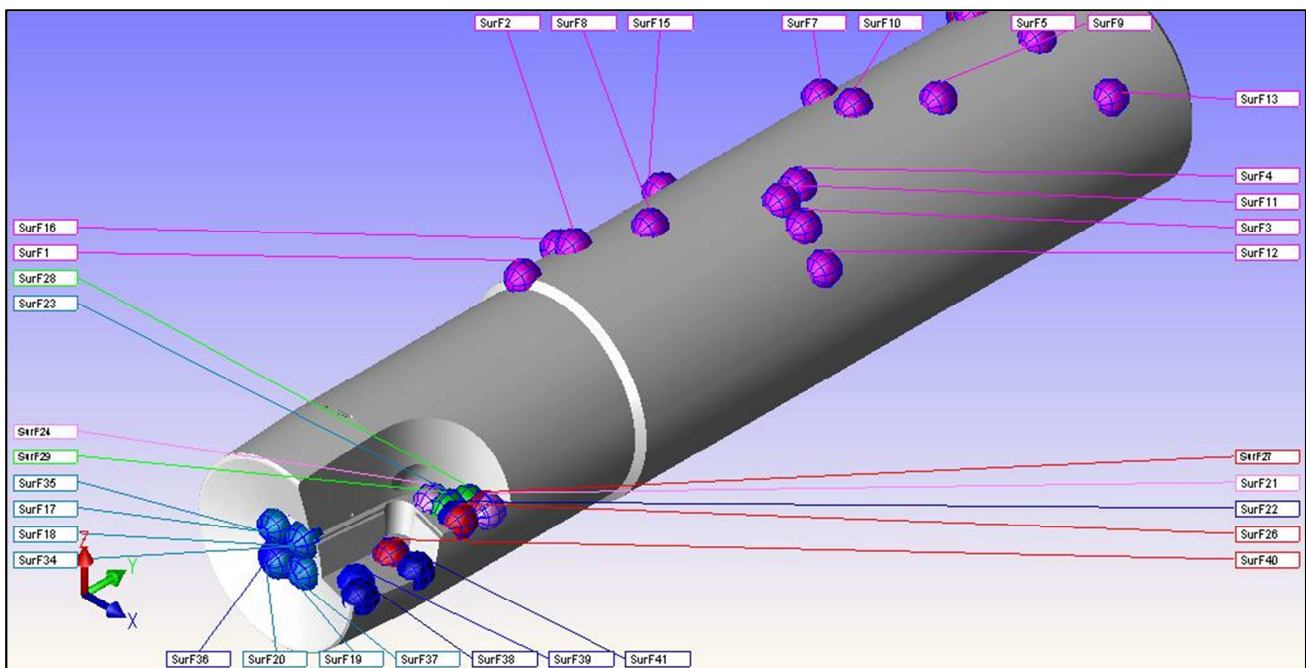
Surface analysis using a Mitutoyo Bright 710 CMM machine
